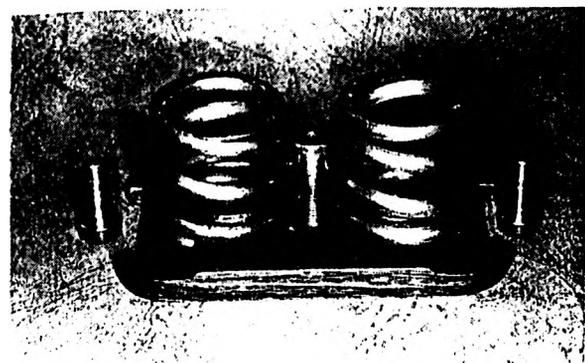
The lower pressure plate and springs of a flask press showing the pin between the springs which transmits the baseplate movement to the anvil of the dial gauge.
